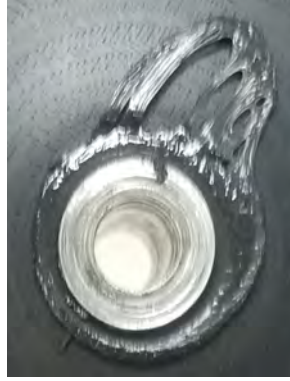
ULTEM 9085 Physical Compressors Post Spin Test Zoomed in - 1st Compressor
